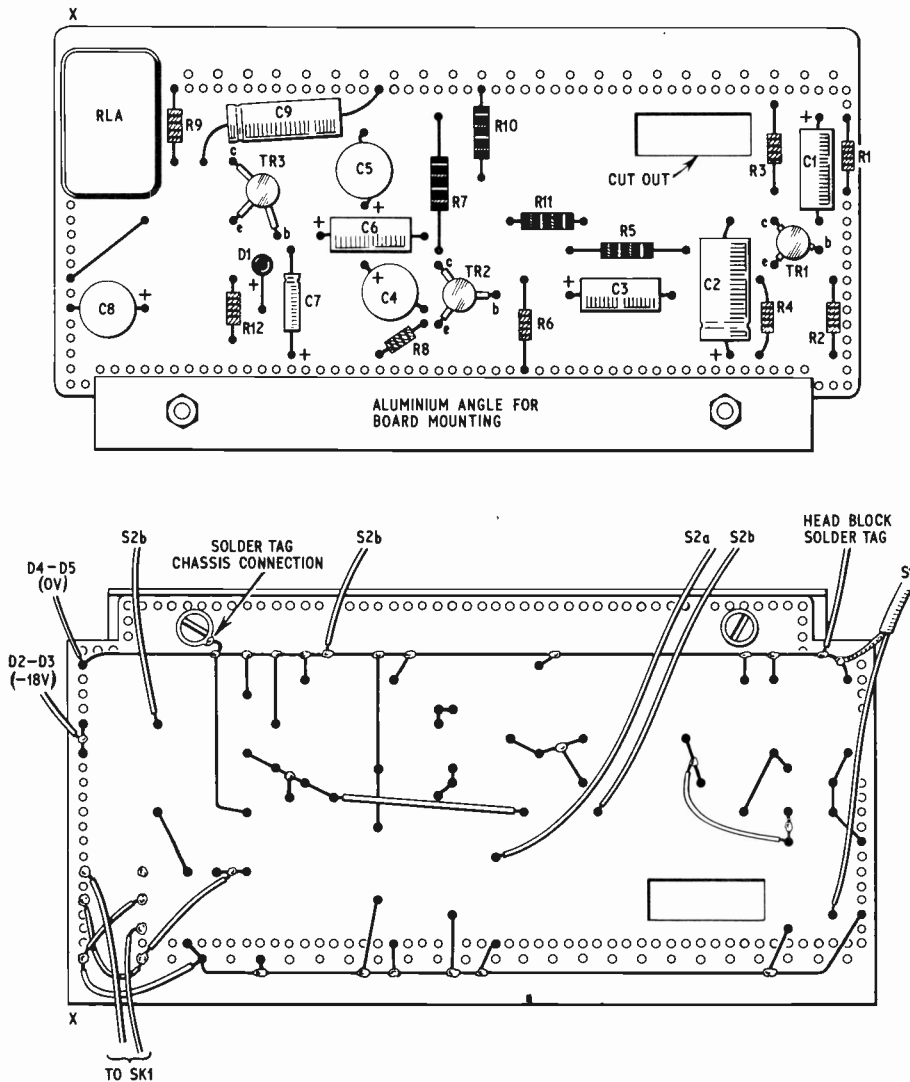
Top and underside details of component mounting and wiring on plain Veroboard. Details of the relay wiring is given in Fig. 1
